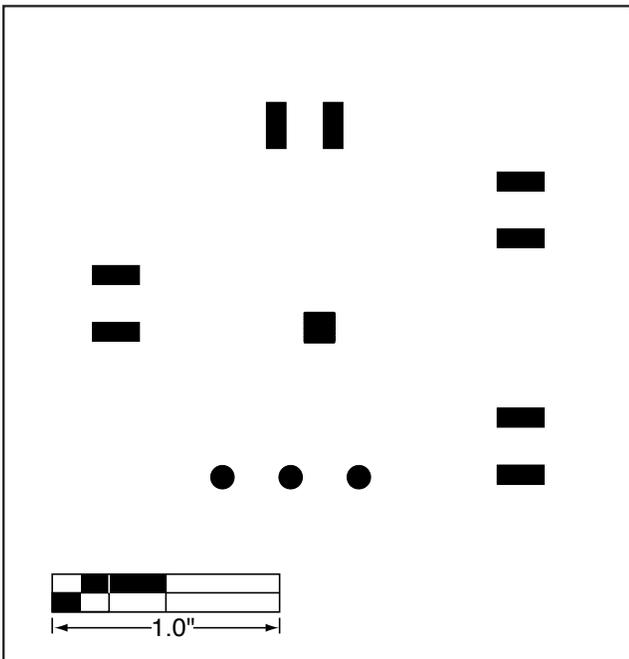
MAX9982 EV Kit PC Board Layout—Bottom Soldermask
